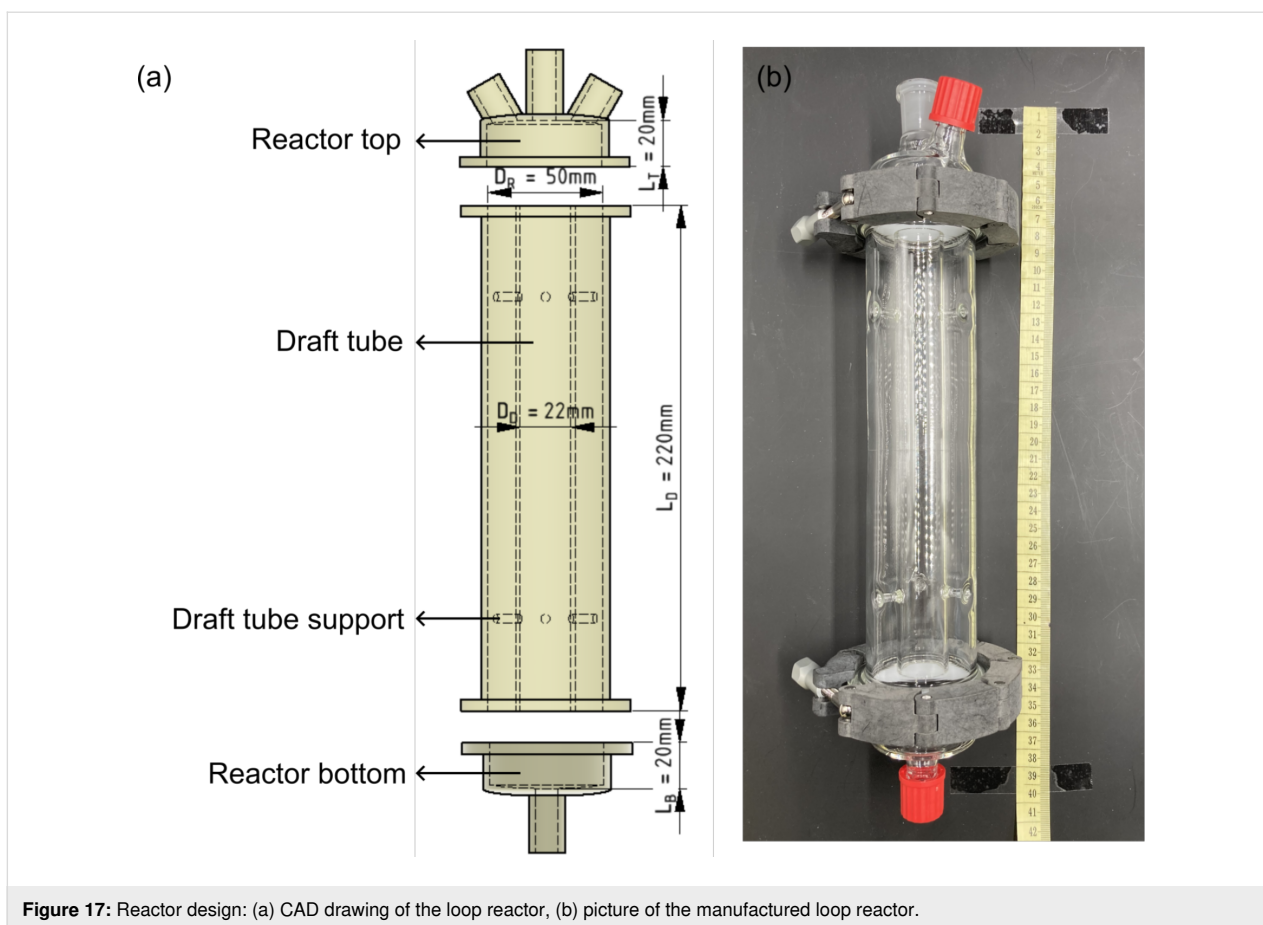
Reactor design: (a) CAD drawing of the loop reactor, (b) picture of the manufactured loop reactor.
